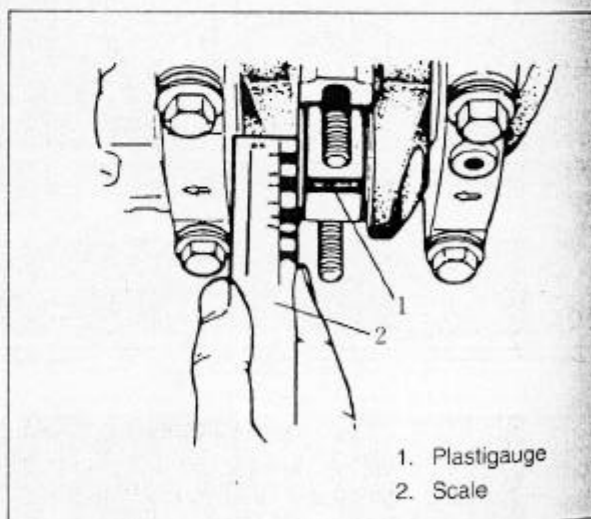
A — 84 MEASURING THE CONNECTING ROD BEARING OIL CLEARANCE
